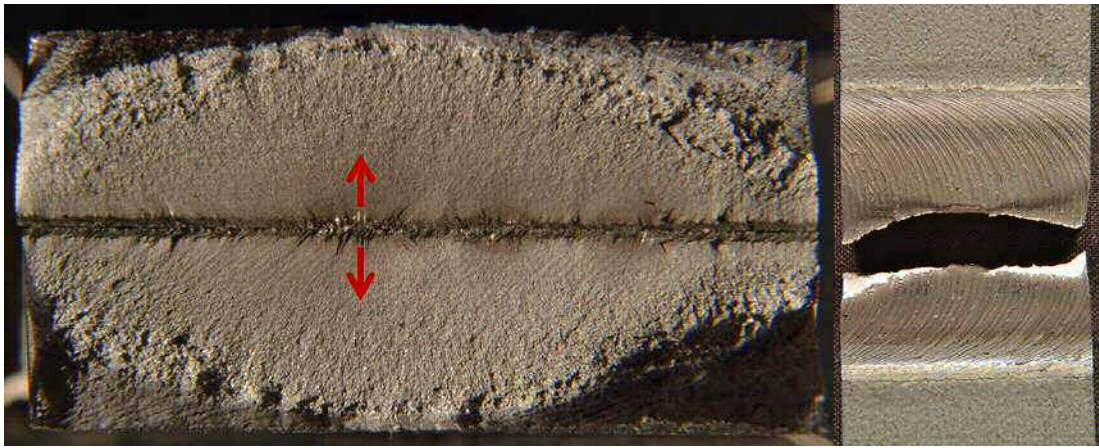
Fast weld sample tested at 80% of YS (731,208 cycles to fracture)
